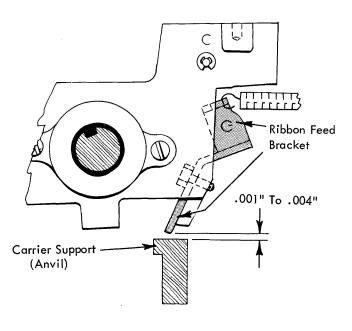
Carrier Support (Long Carriage Machines)
